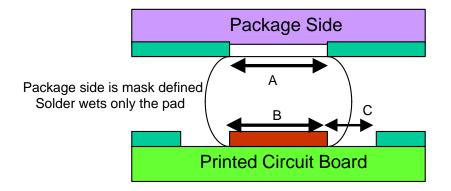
Recommended Dimensions for the AMD 0.30 mm Solder Ball
